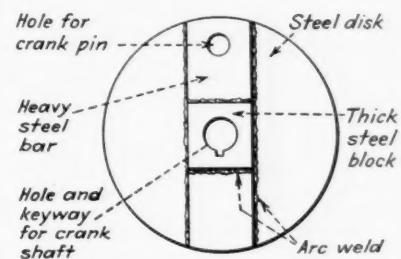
New welded crank disk for reciprocating feeder.
